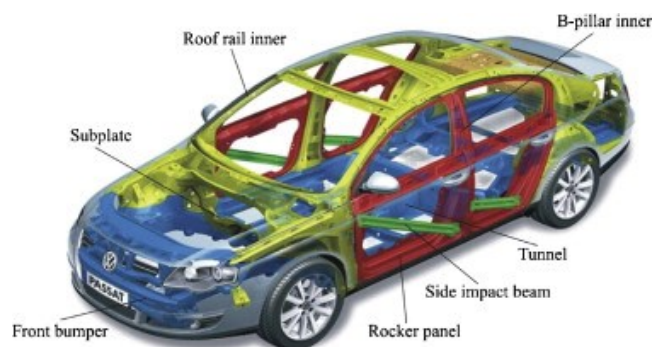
Hot stamped parts in a typical middle class car [128].
